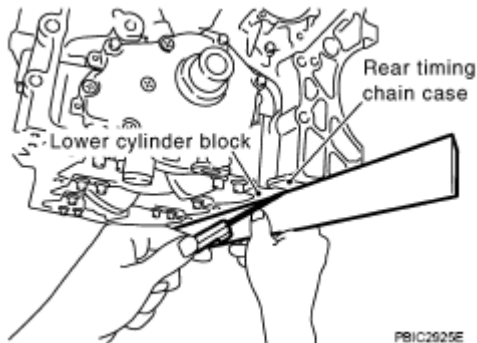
Checking Surface Height Difference Between Parts On Oil Pan (Upper) Mounting Surface
